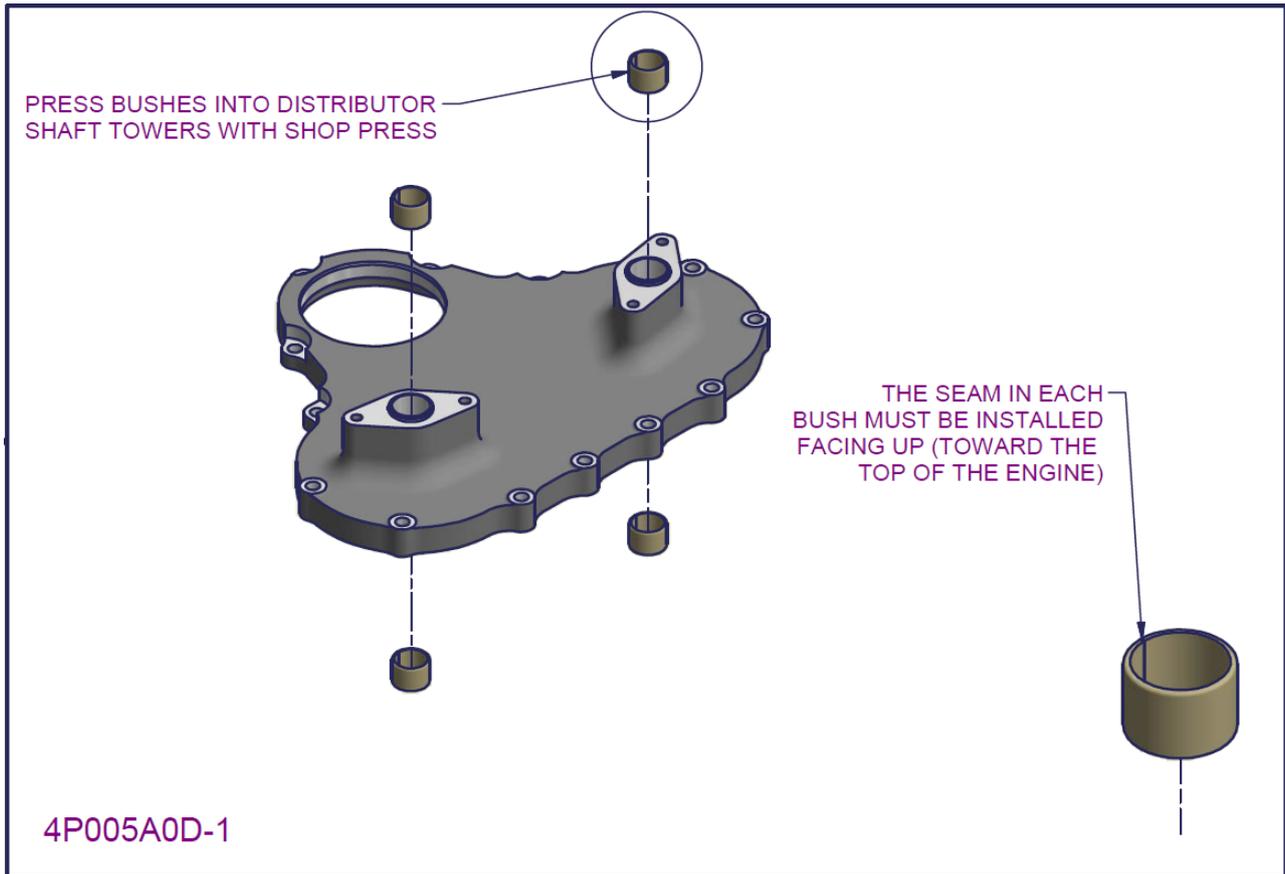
2200/3300 Distributor gearbox subassembly 1
